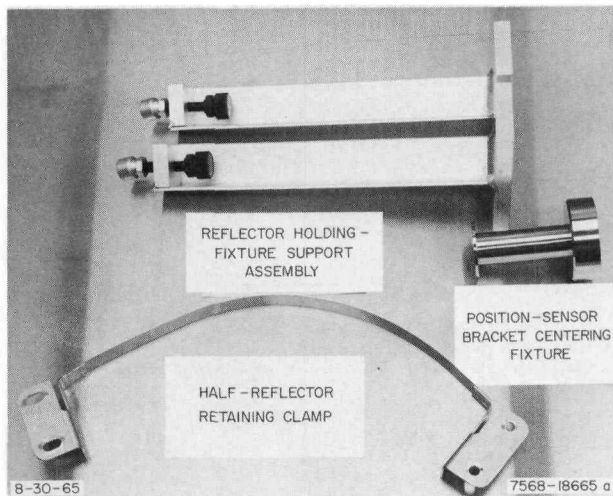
S8DS Control-Drum Bearing Assembly Tooling
